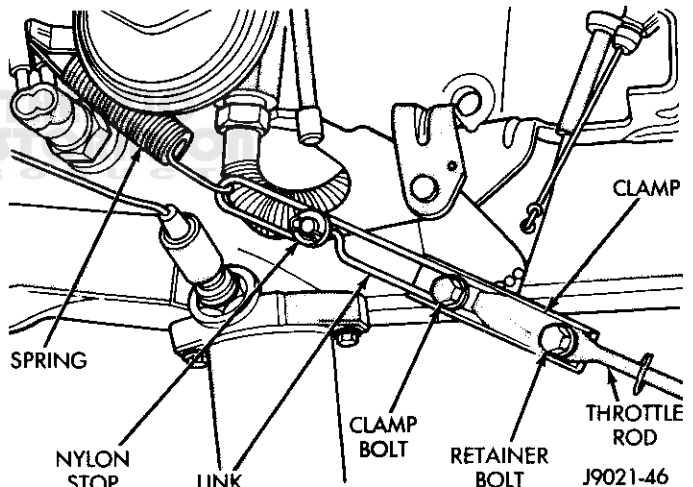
Linkage Adjustment – 6 Cylinder Engine
